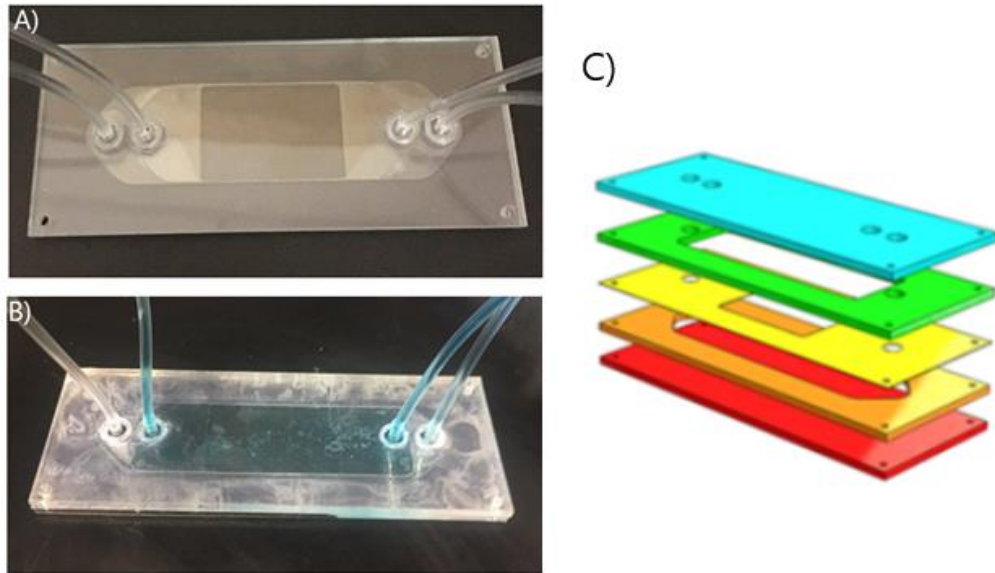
AED device fabrication with multilayer lamination. A) Photo of fabricated device with multilayer pressure lamination. B) demonstration of flow inside the fabricated device to visualize fluid mixing. Clear and blue dyed PBS/1%BSA were injected to the Cell and Buffer inlet and the collected fluid in each outlet was analyzed by UV spectrophotometry to find the fluid mixing.
